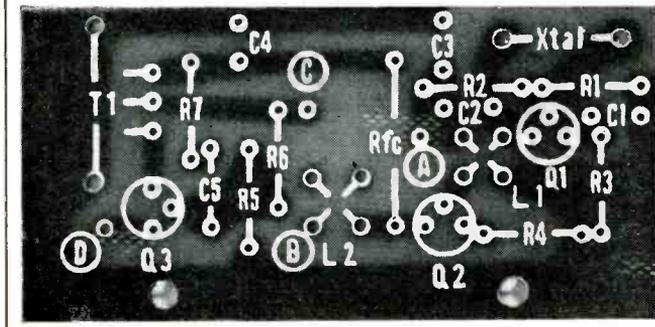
Component side of board showing parts location and points at which to attach leads.
